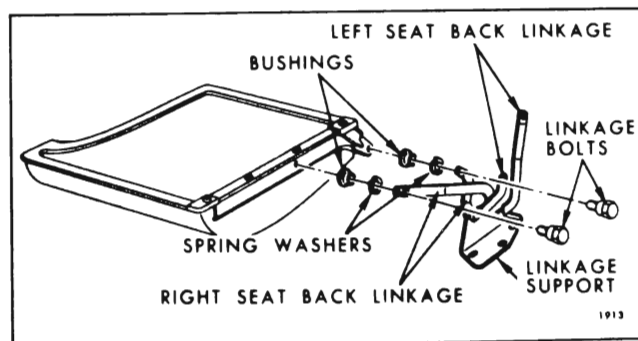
Folding Second Seat Back Inner Linkage and Support
